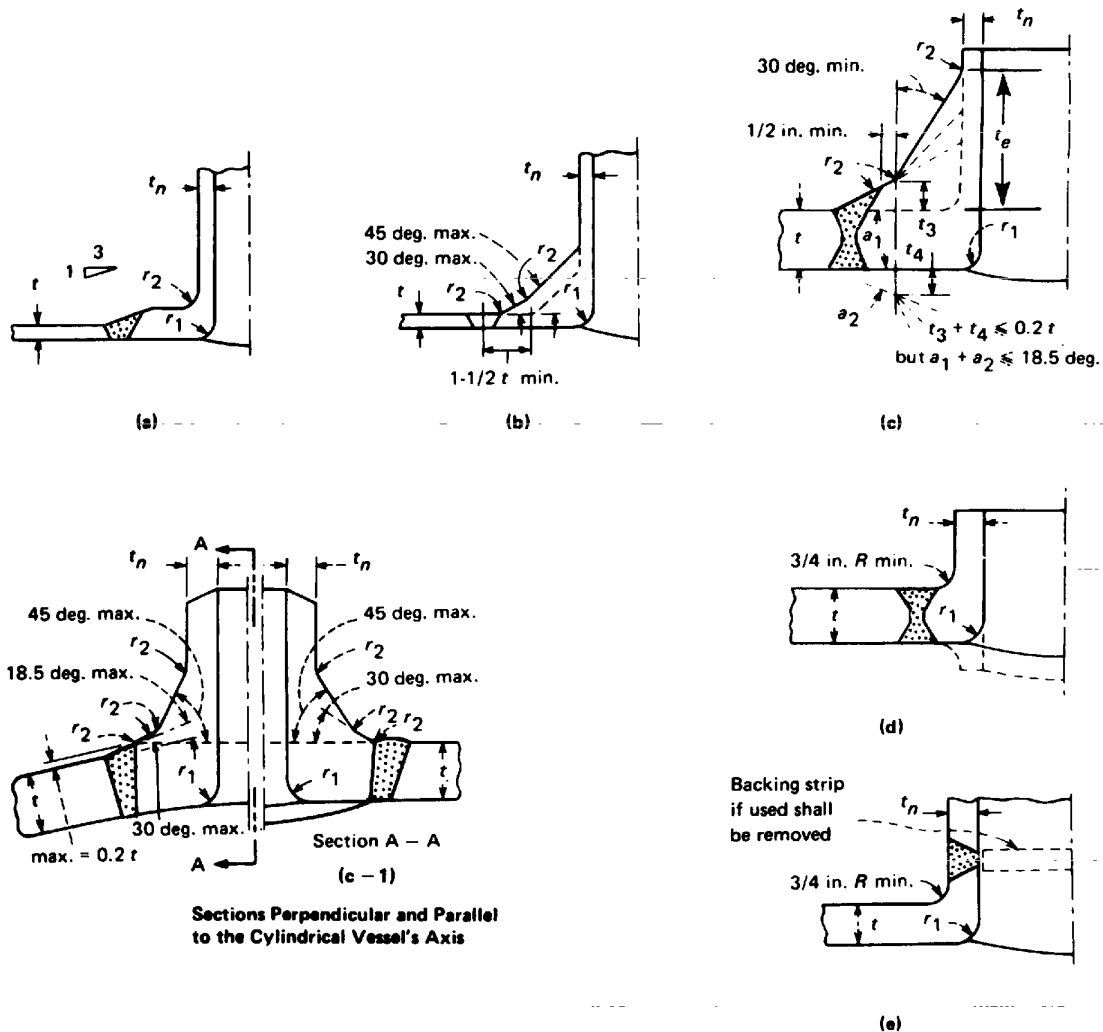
(a)-1 NOZZLES ATTACHED BY FULL PENETRATION BUTT WELDS
